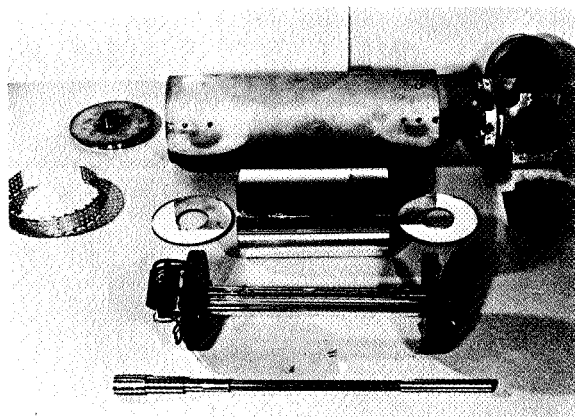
Exploded View of Laser (Without Collimating Optics).
